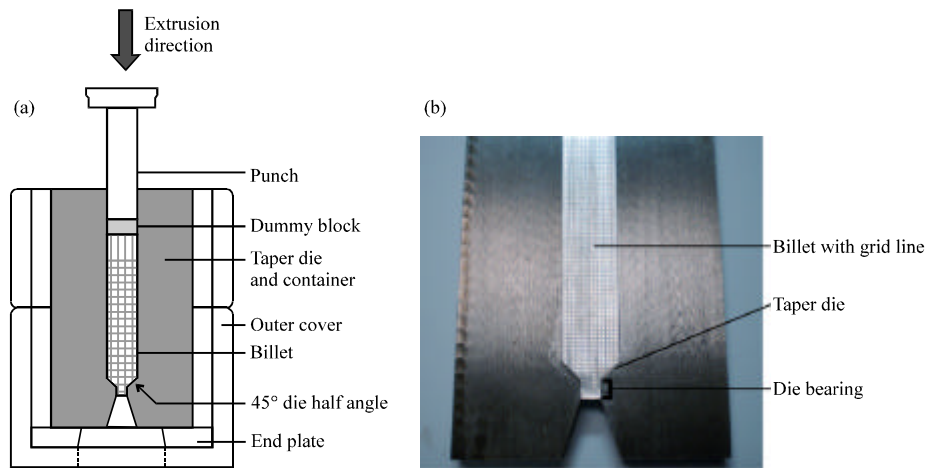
(a) A schematic sketch of plane strain extrusion apparatus and (b) a photograph of the taper die and billet
